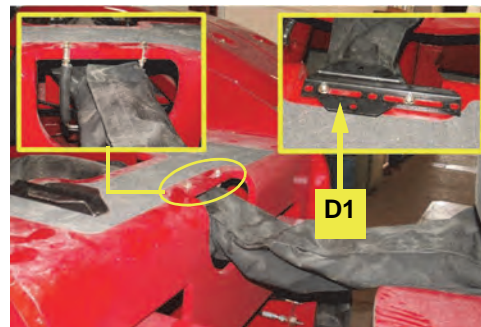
with insets: Steering block mounting location and, inset, mounting bracket D1 installed
